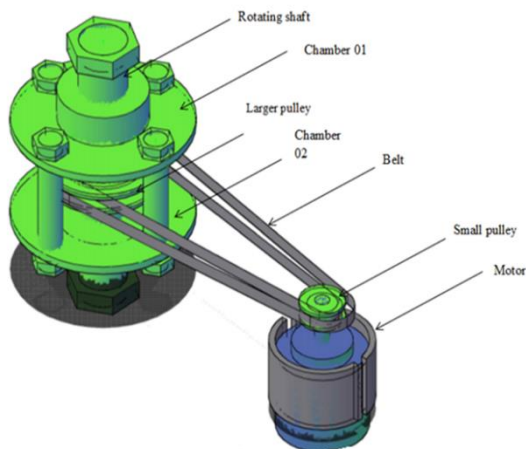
Schematic diagram of the pulley and belt arrangement fixed to the nozzle assembly
